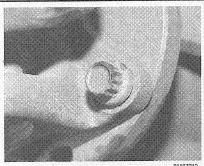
The bolts retaining the rear driveshaft yoke-to-differential flange require a 12mm, 12 point wrench or socket to loosen them
